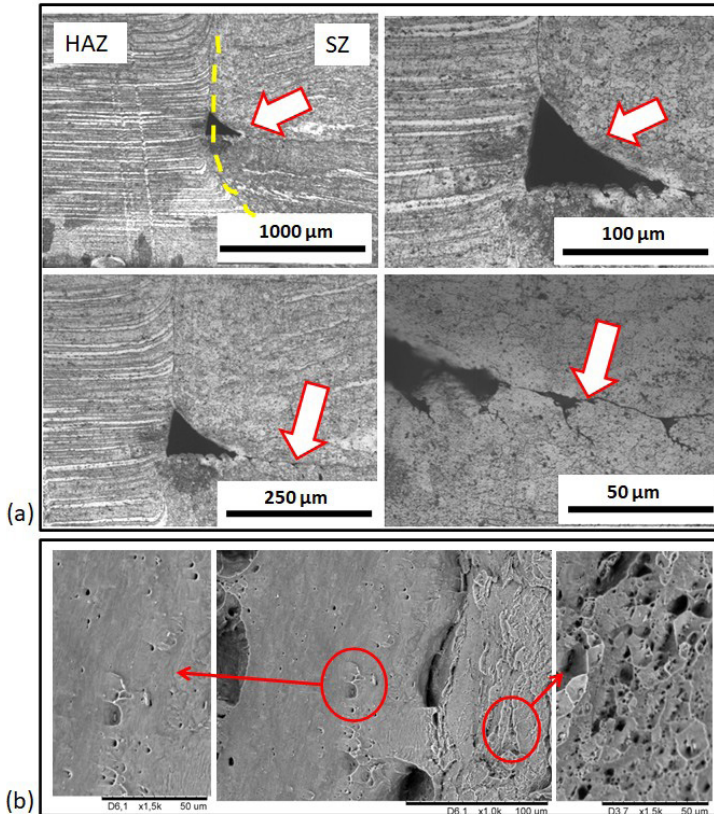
Optical macrograph results of the extruded samples AA6005-T6 after welding by FSW at different tool rotational speeds.
